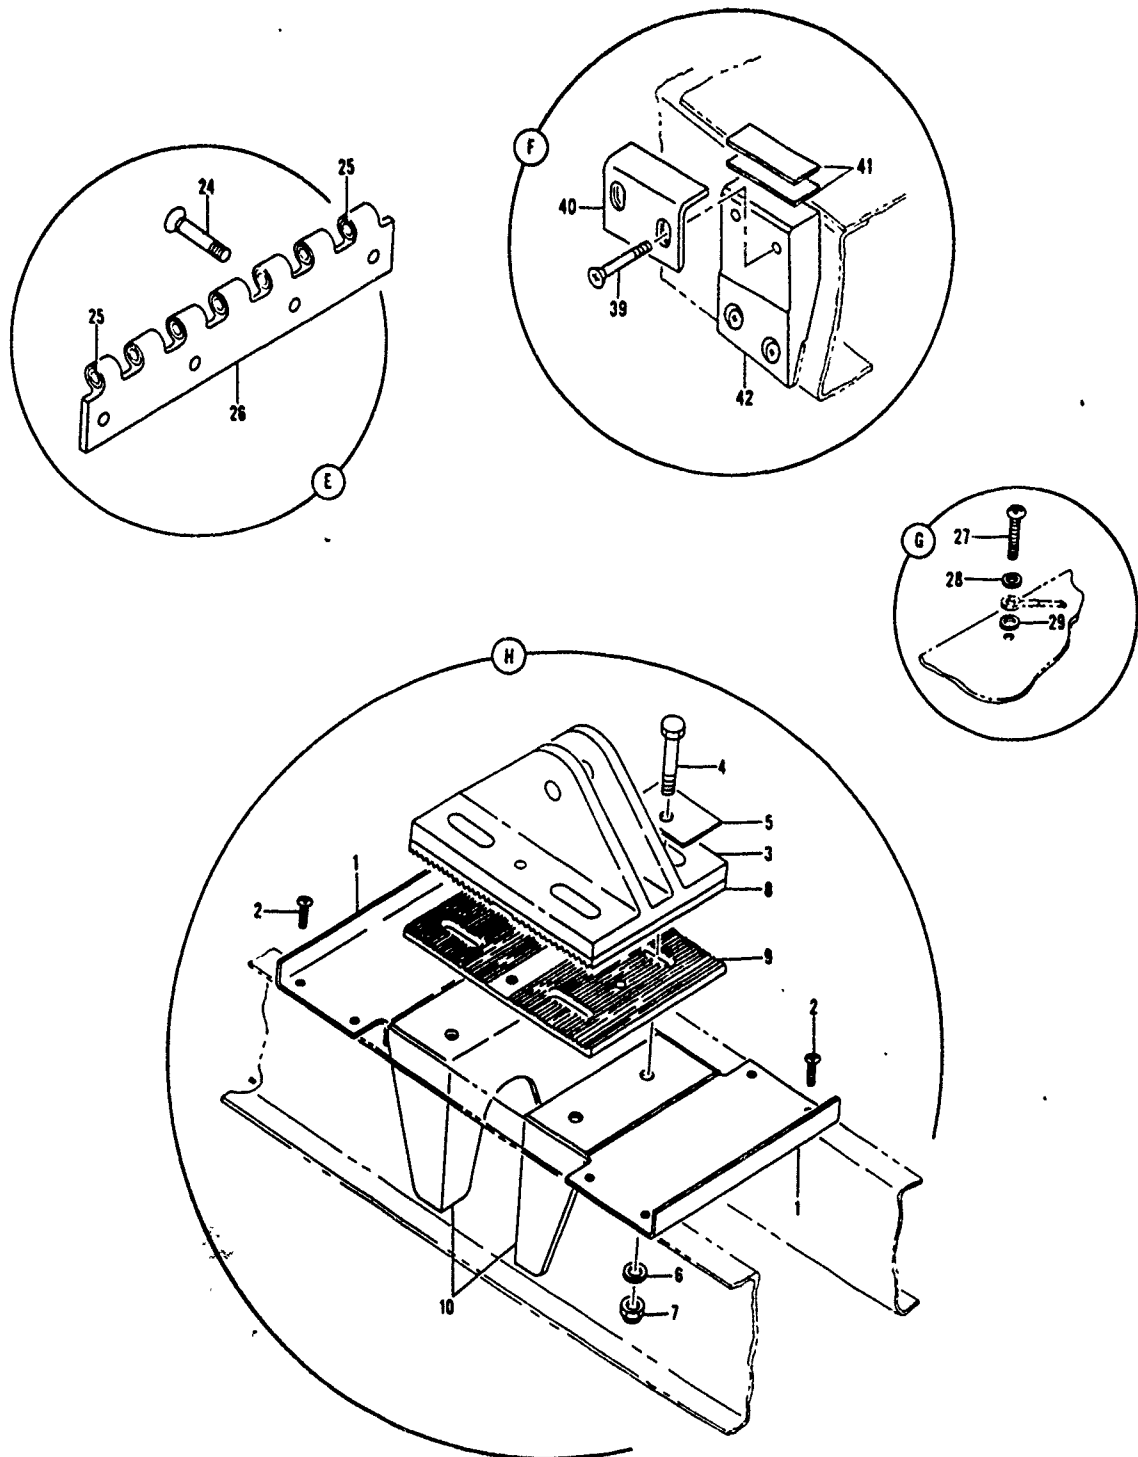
Main Gear Inboard Door Assemblies (Sheet 2 of 3)
